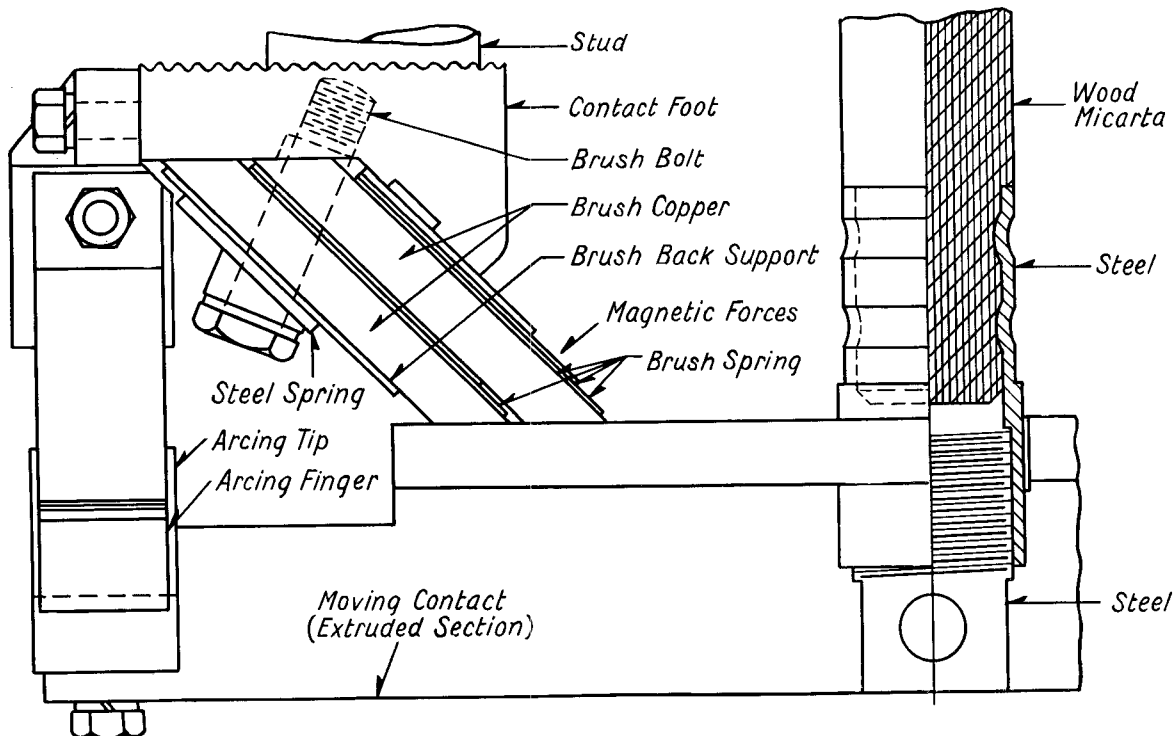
CONTACT ASSEMBLY FOR 2000-AMPERE BREAKER
